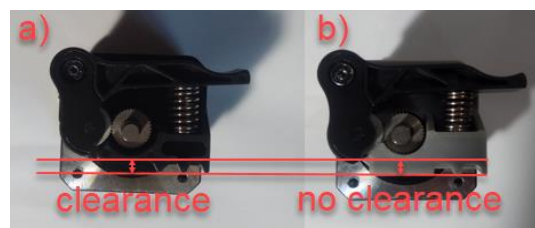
Wanhao Duplicator i3 Plus extruder cold end: (a) with clearance; (b) without clearance
